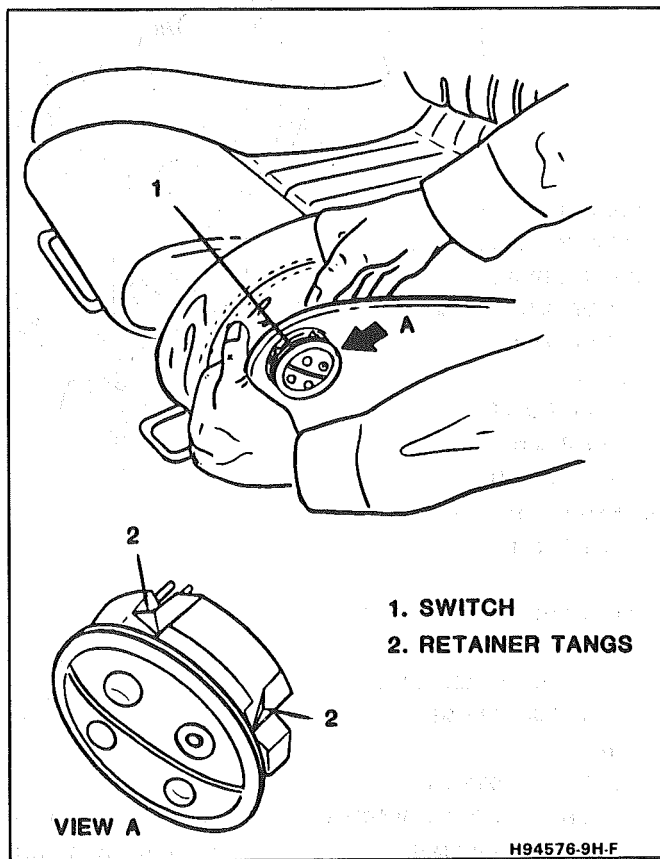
Removing Switch Assembly (AQ9 Seat)
